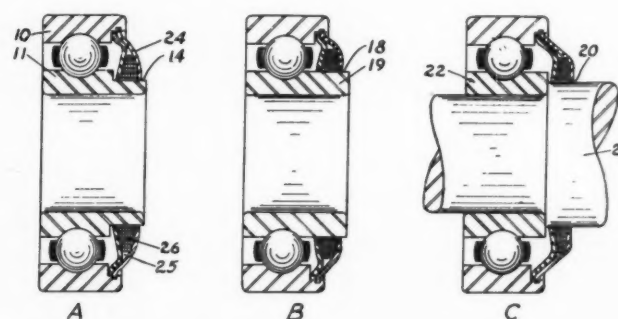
Three sectional views showing oil retention construction for ball bearings. Two plates with felt between comprise seal
